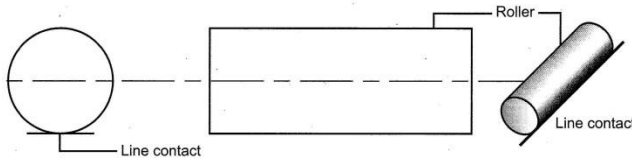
(a) Line contact in a cylindrical roller bearing
